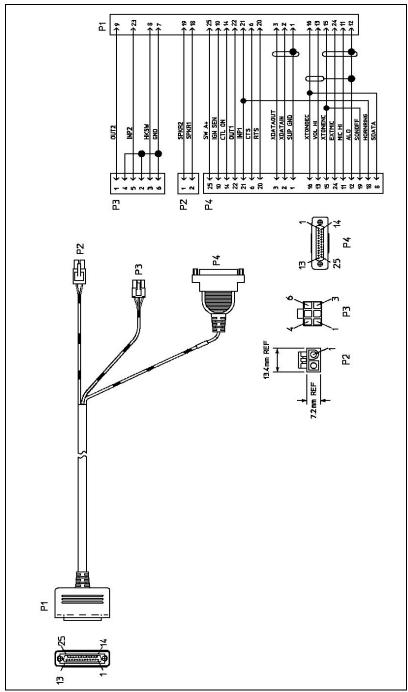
Remote Mount Extended Option Accessory Cable 19B802554P7
